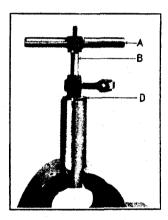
Valve Rocker Arm Bushing Press 89077: Withdrawing Pilot.
